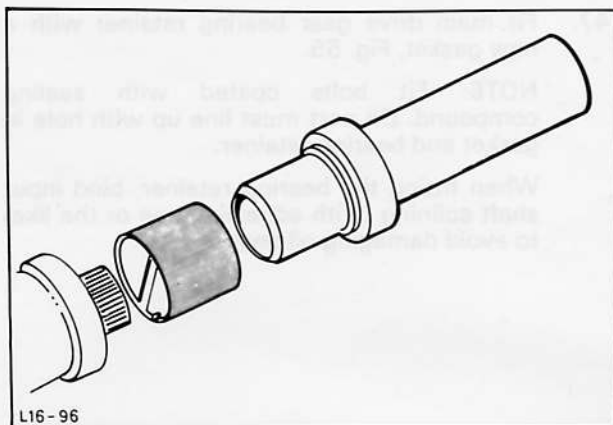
Press in extension housing bush with Special Tool No. 16-015
